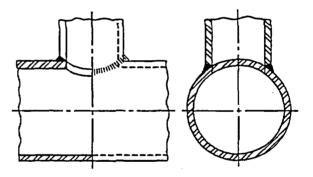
(A) TYPICAL WELDED BRANCH CONNECTION WITHOUT ADDITIONAL REINFORCEMENT
